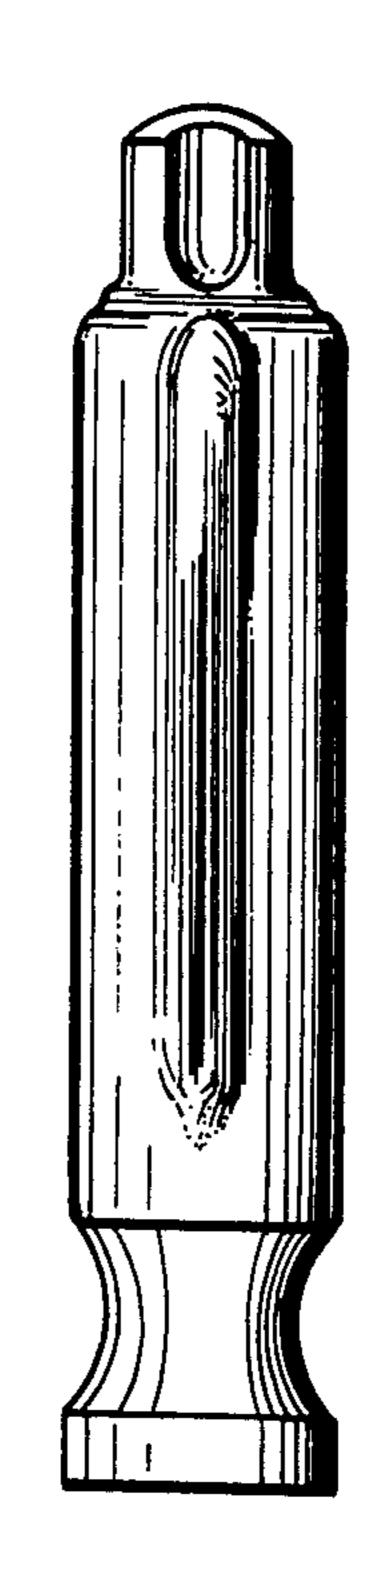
is a perspective view of another tool handle particularly useful for screwdrivers of my invention. FIG. 7 is a side elevation of the tool handle of FIG. 6. FIG. 8 is a front elevation of the tool handle of FIG. 6, with the position of a screw driver blade or the like indicated by dotted lines for illustrative purposes only. FIG. 9 is a top plan view of the tool handle of FIG. 6. FIG. 10 is a bottom plan view of the tool handle of FIG. 6.
